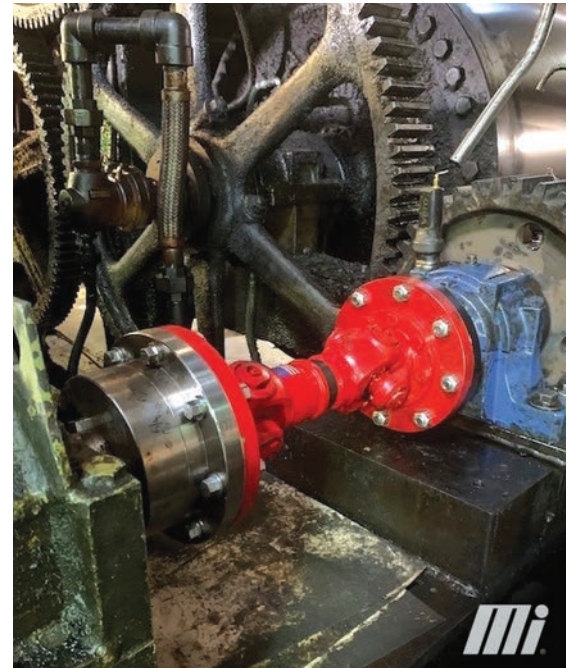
Installed in a paper mill, this driveshaft features new universal shaft joints that fixed a misalignment issue. The gear couplings were also replaced.
